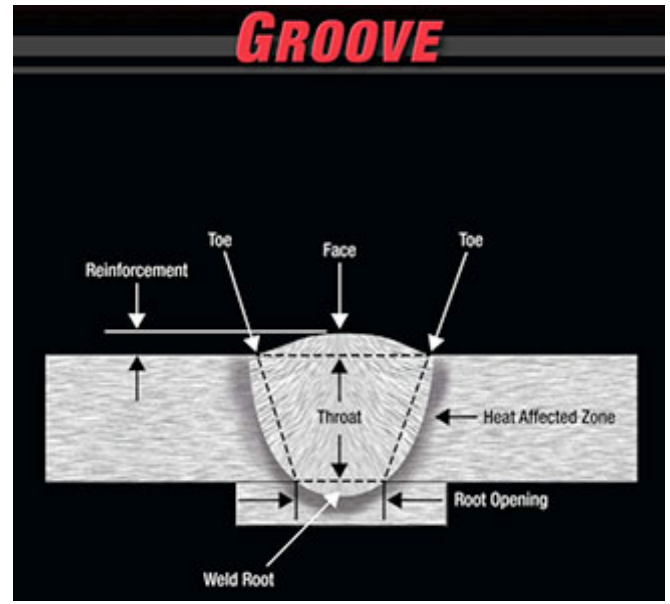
Parts of a Groove Weld (by Lincoln Electric, Public Domain)
